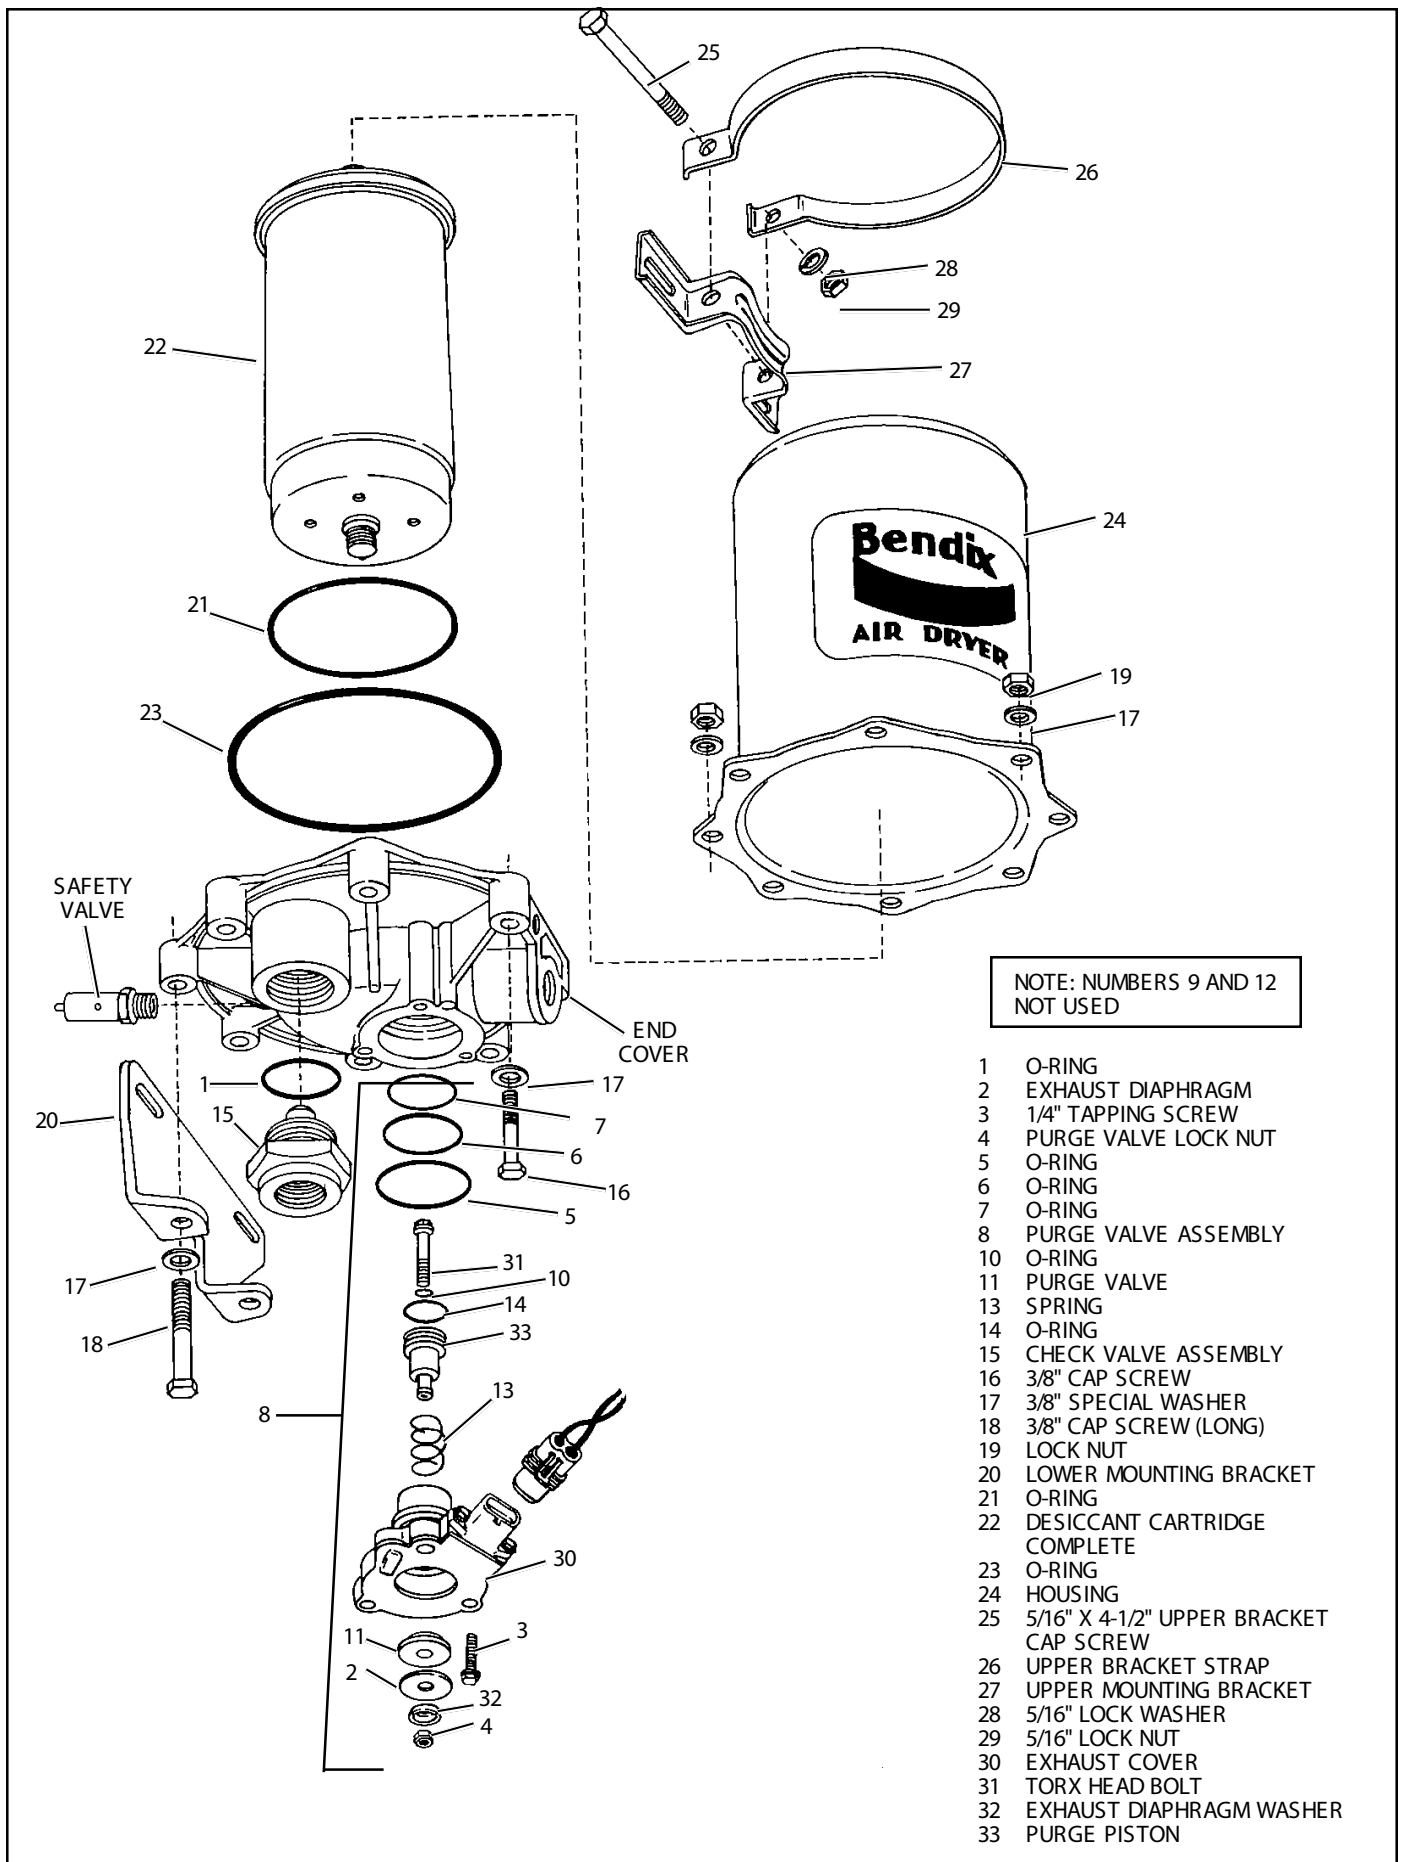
AD-9 AIR DRYER ASSEMBLY
